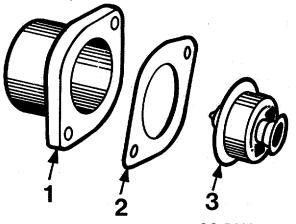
Exploded View of Thermostat, Gasket and Engine Water Outlet
